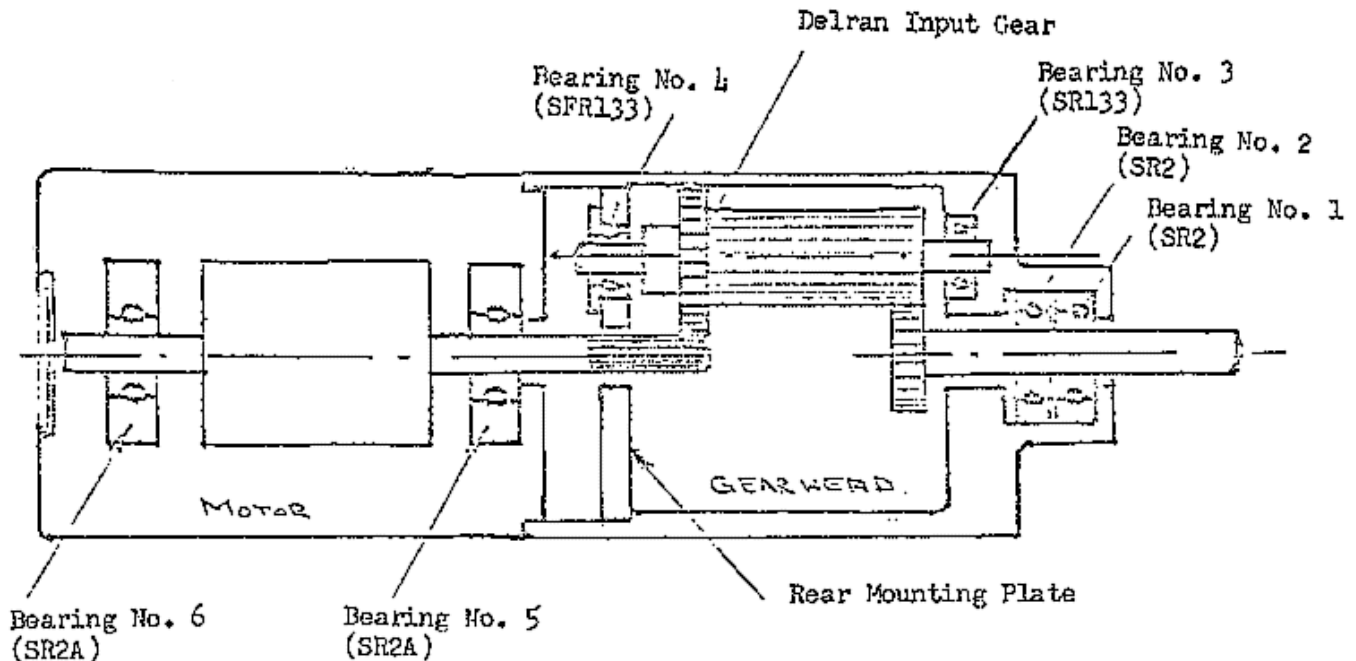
Color Wheel Motor/Gearhead Bearing Conf.
